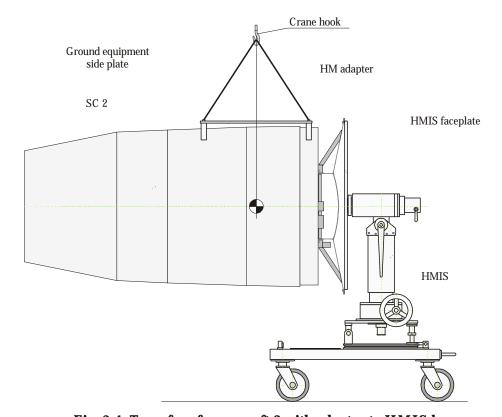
Transfer of spacecraft 2 with adapter to HMIS by crane
